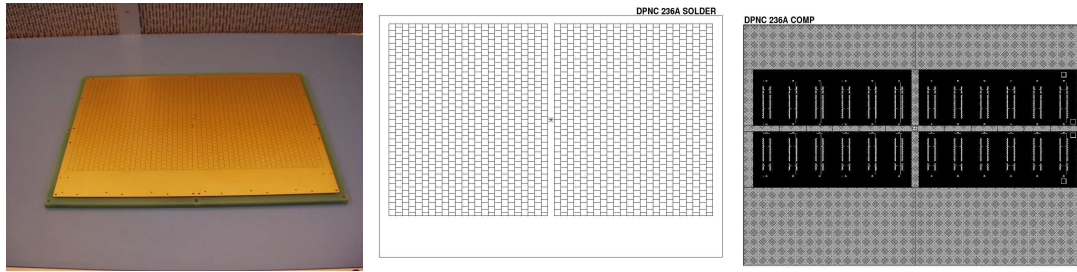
Pad plane view (Left), pad side (Middle) and connector side (Right) drawings.
